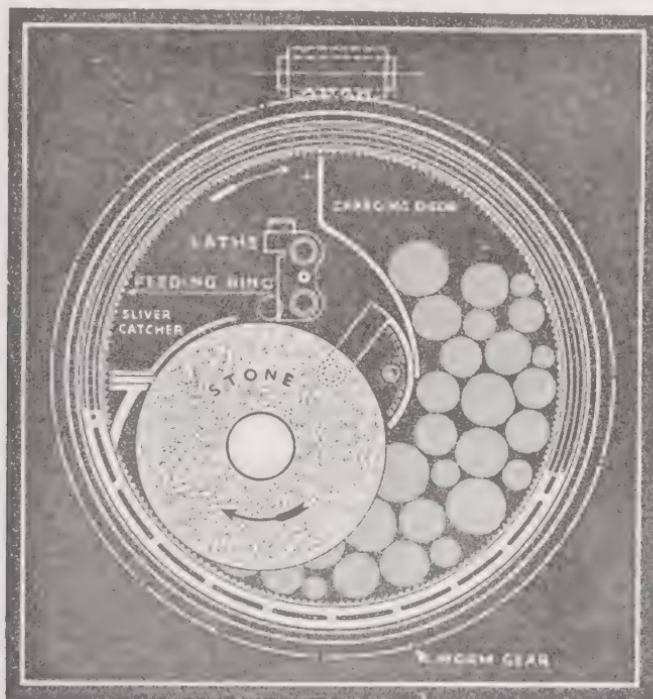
Elevation Sketch of a Recently Developed Woodpulp Grinder Showing Principles of Operation. (Courtesy of The Appleton Machine Co.)
